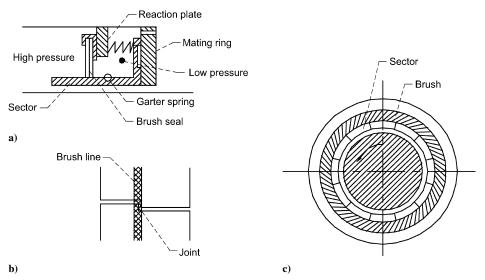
Schematic of film riding brush seal: a) assembly, b) joint, and c) installed. 143
